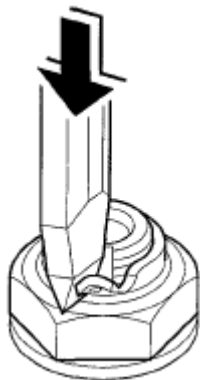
Cutting Locking Tab Of Transfer Shaft Locknut With Chisel
